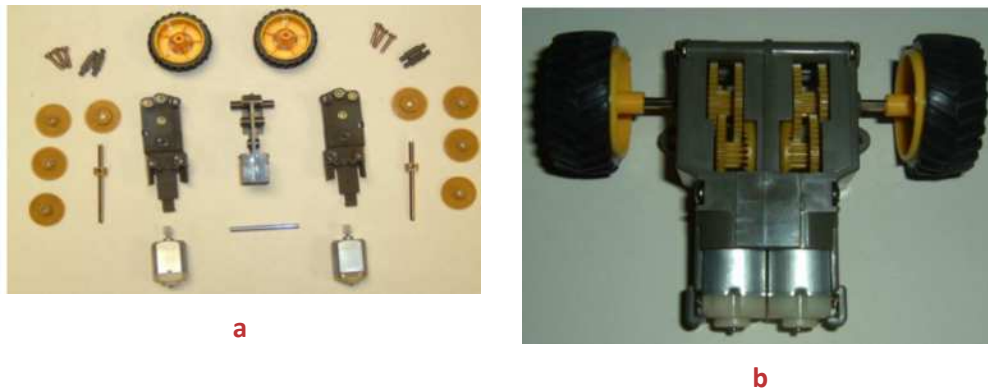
Parts of the gearbox (a) and assembled gearbox (b) (Castles et al., 2010)
